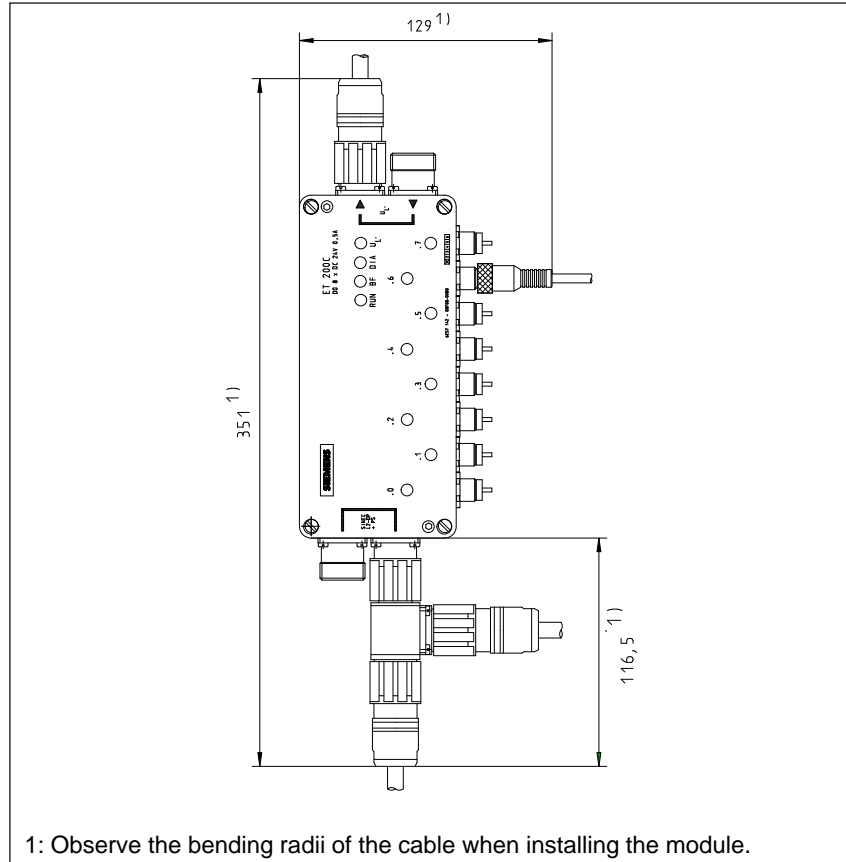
Digital Output Module ET 200C; DO 8 × DC 24 V/0.5A; Dimension Drawing with T Connector and Plug Connectors (with Pin/Socket Inserts)
